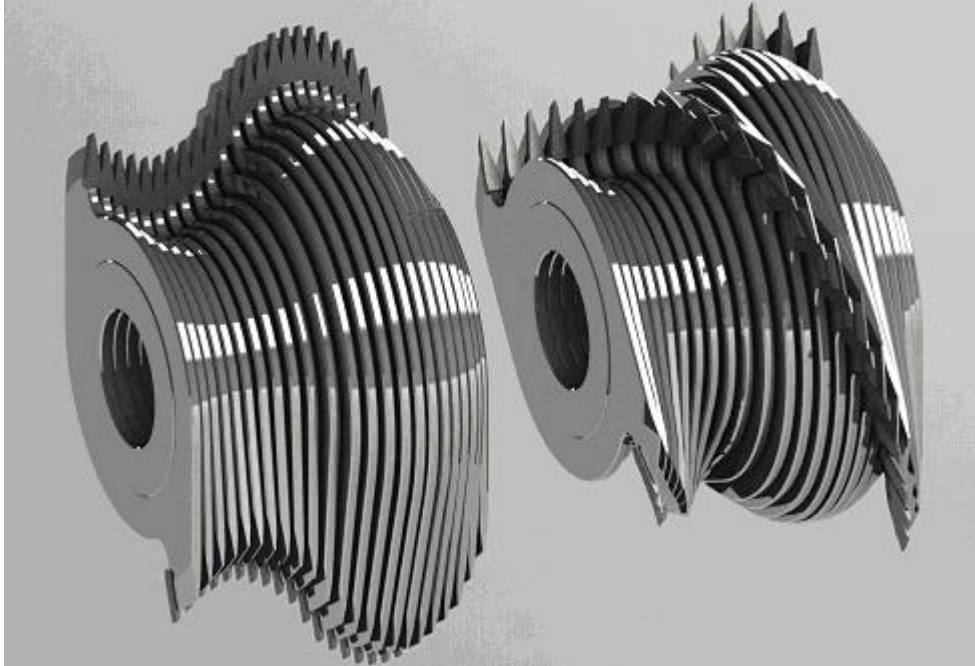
Cutterhead before (a) and (b) after turning wing cutters along the helix
